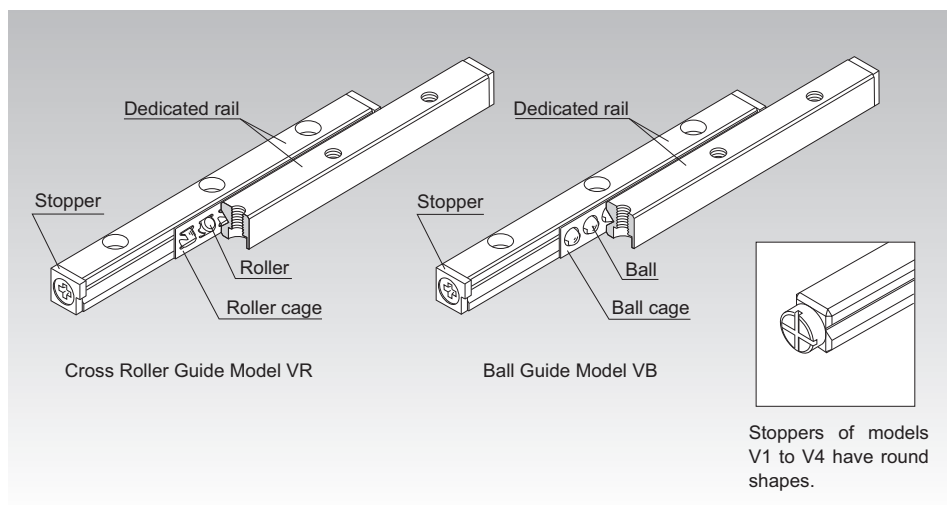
Structure of Cross Roller Guide Model VR and Ball Guide Model VB
